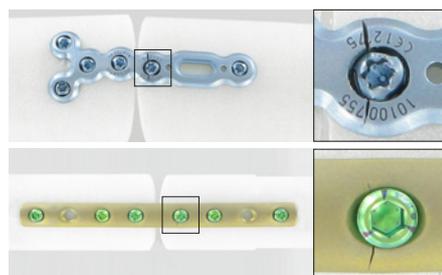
Medartis APTUS 2.5 TriLock plate (top) and one-third tubular plate (bottom) after testing; the insert shows a magnification of the fracture zone.
